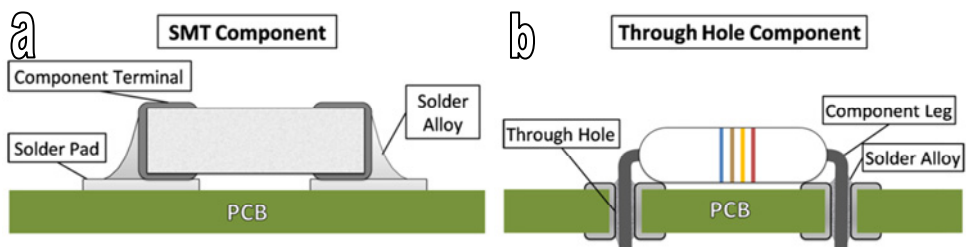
Illustration of a) SMT component and b) through hole component soldered on to a PCB
